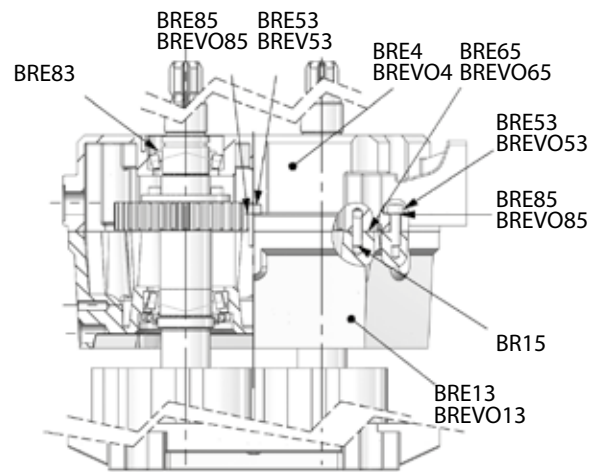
Vertical assembly of the gearcase (step 2).
